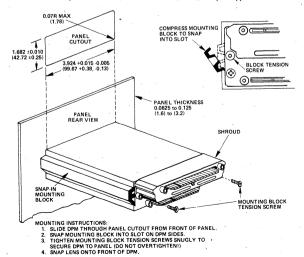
AD2036 Mounting Instructions (Dimensions shown in inches and (mm))
